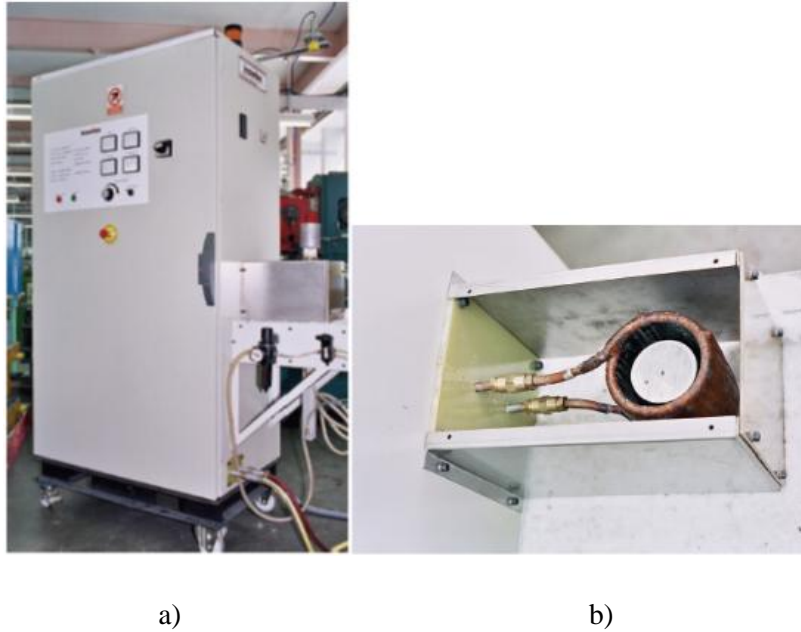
a) Equipment used for the induction heating of the billets b) Induction coils.
